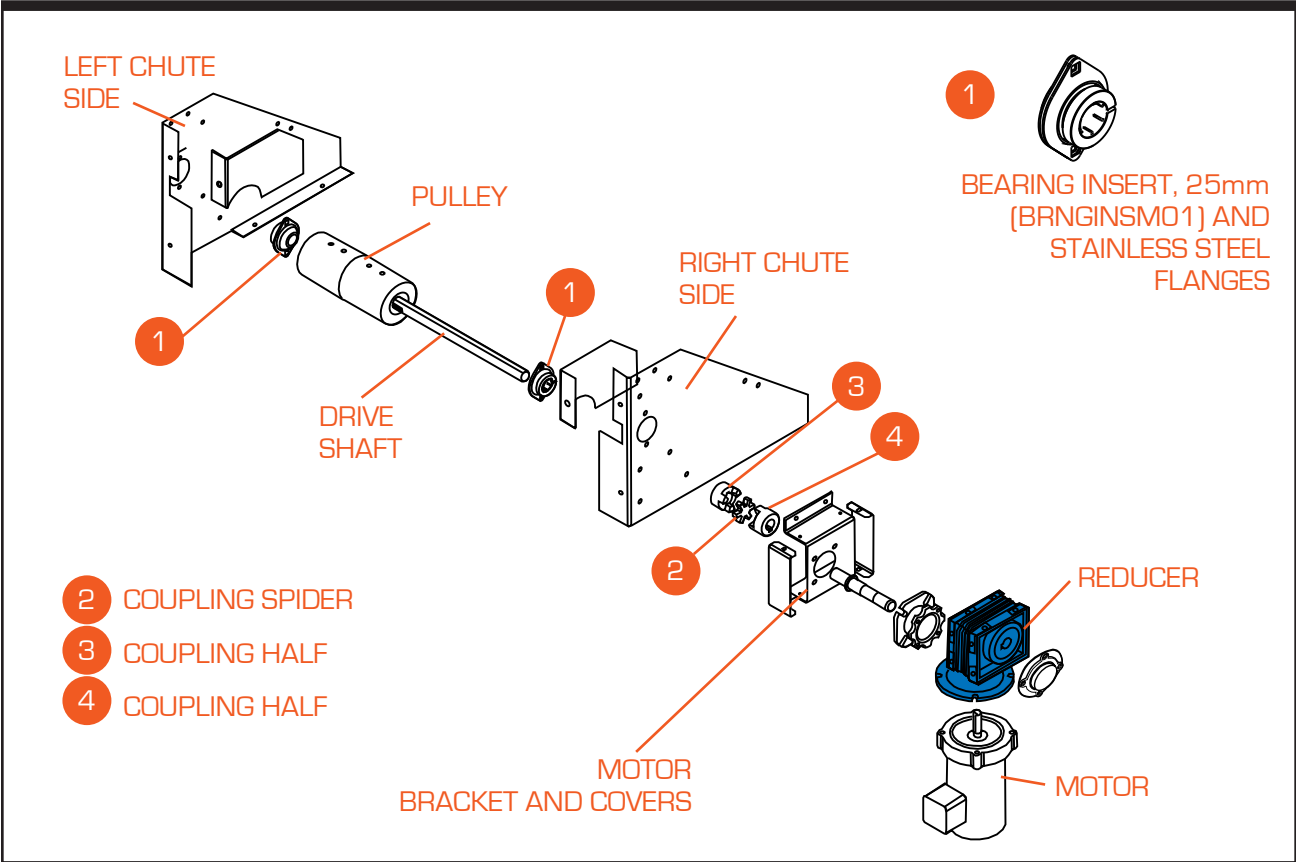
Drive Pulley (Head) with DC Motor/Reducer Sub-Assembly
